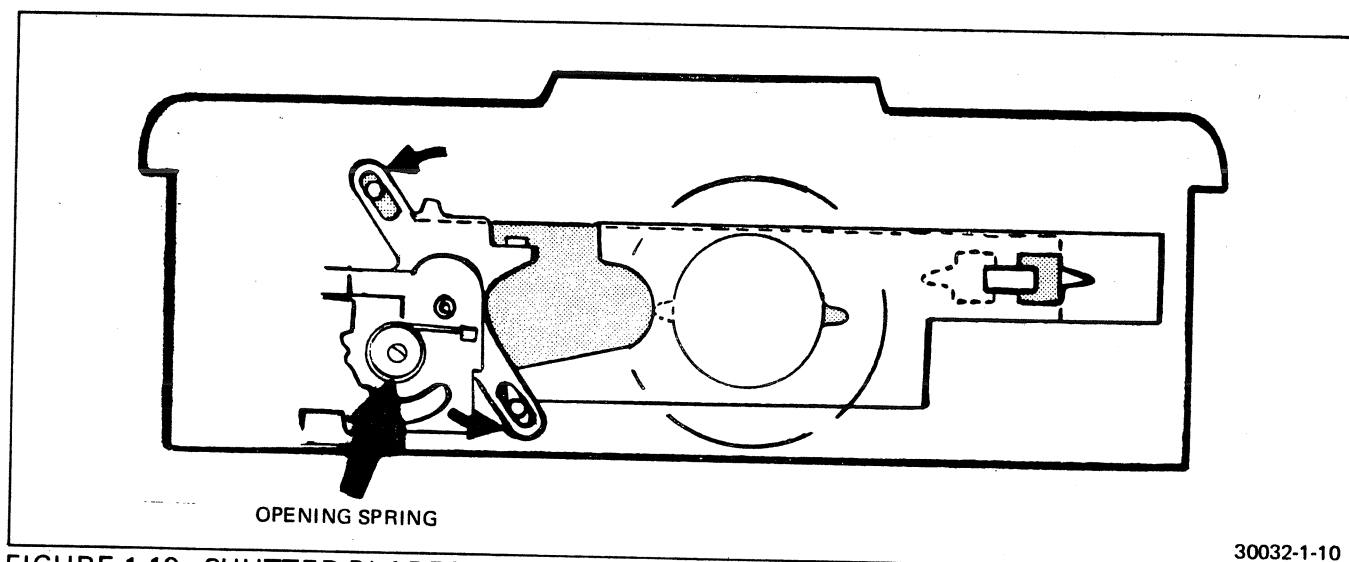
SHUTTER BLADES HELD OPENED
